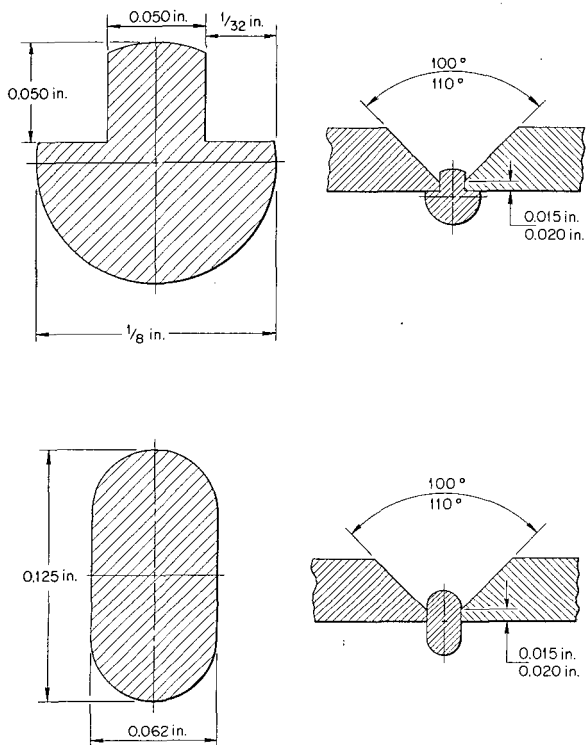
Design and Position of Preplaced Titanium Weld Root Inserts.
